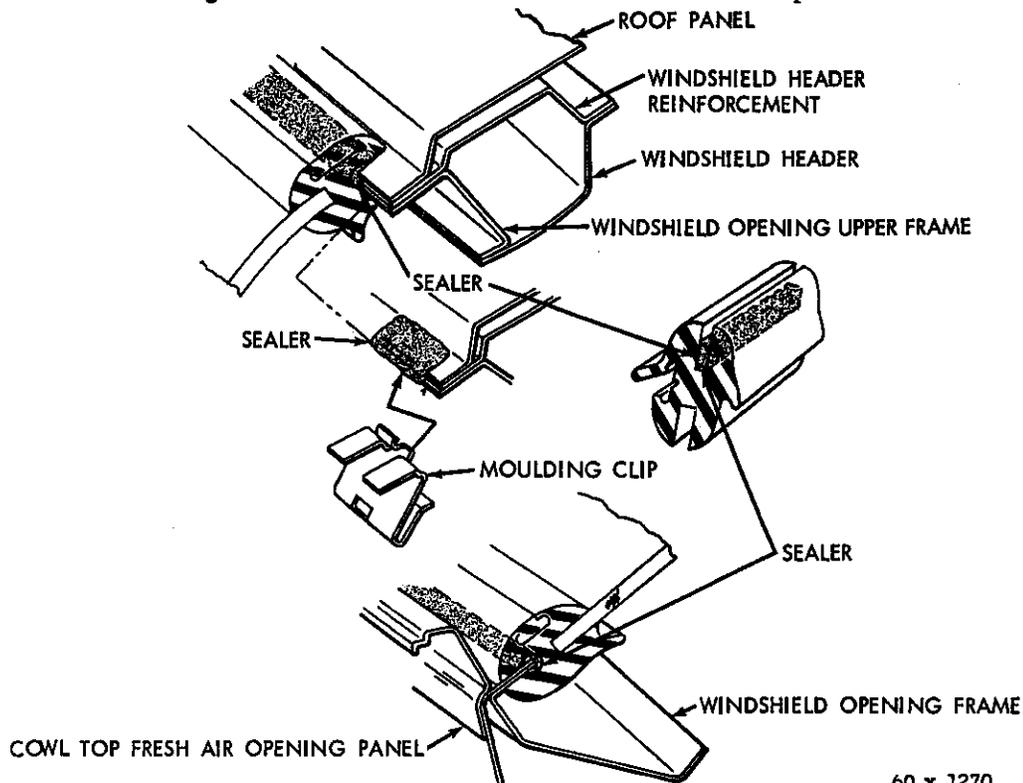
Windshield Weatherstrip Cowl and Roof Panel Sealing
